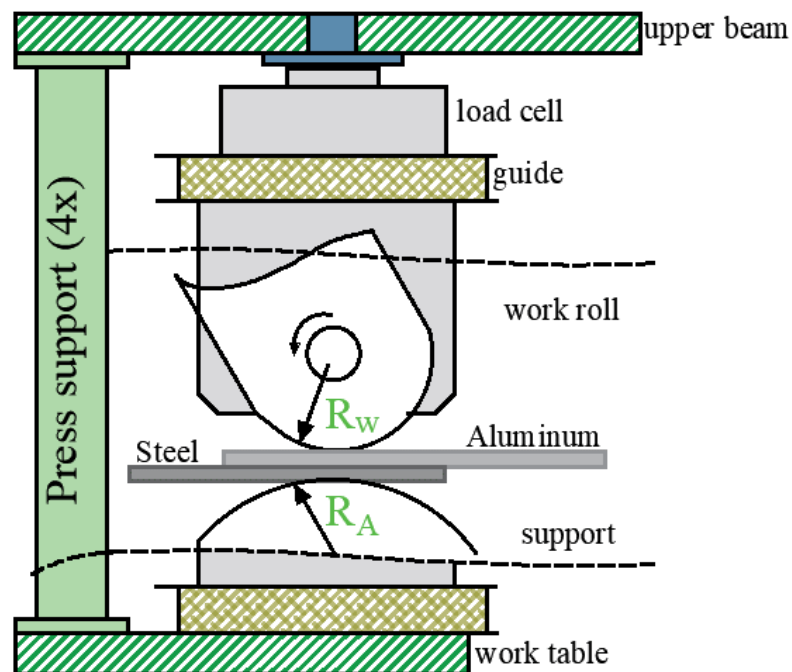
Setup of the experimental tool for incremental rolling pressure welding, depicted with a force transducer for the measurement of rolling force (drawing based on Schmidt ^[16]).
